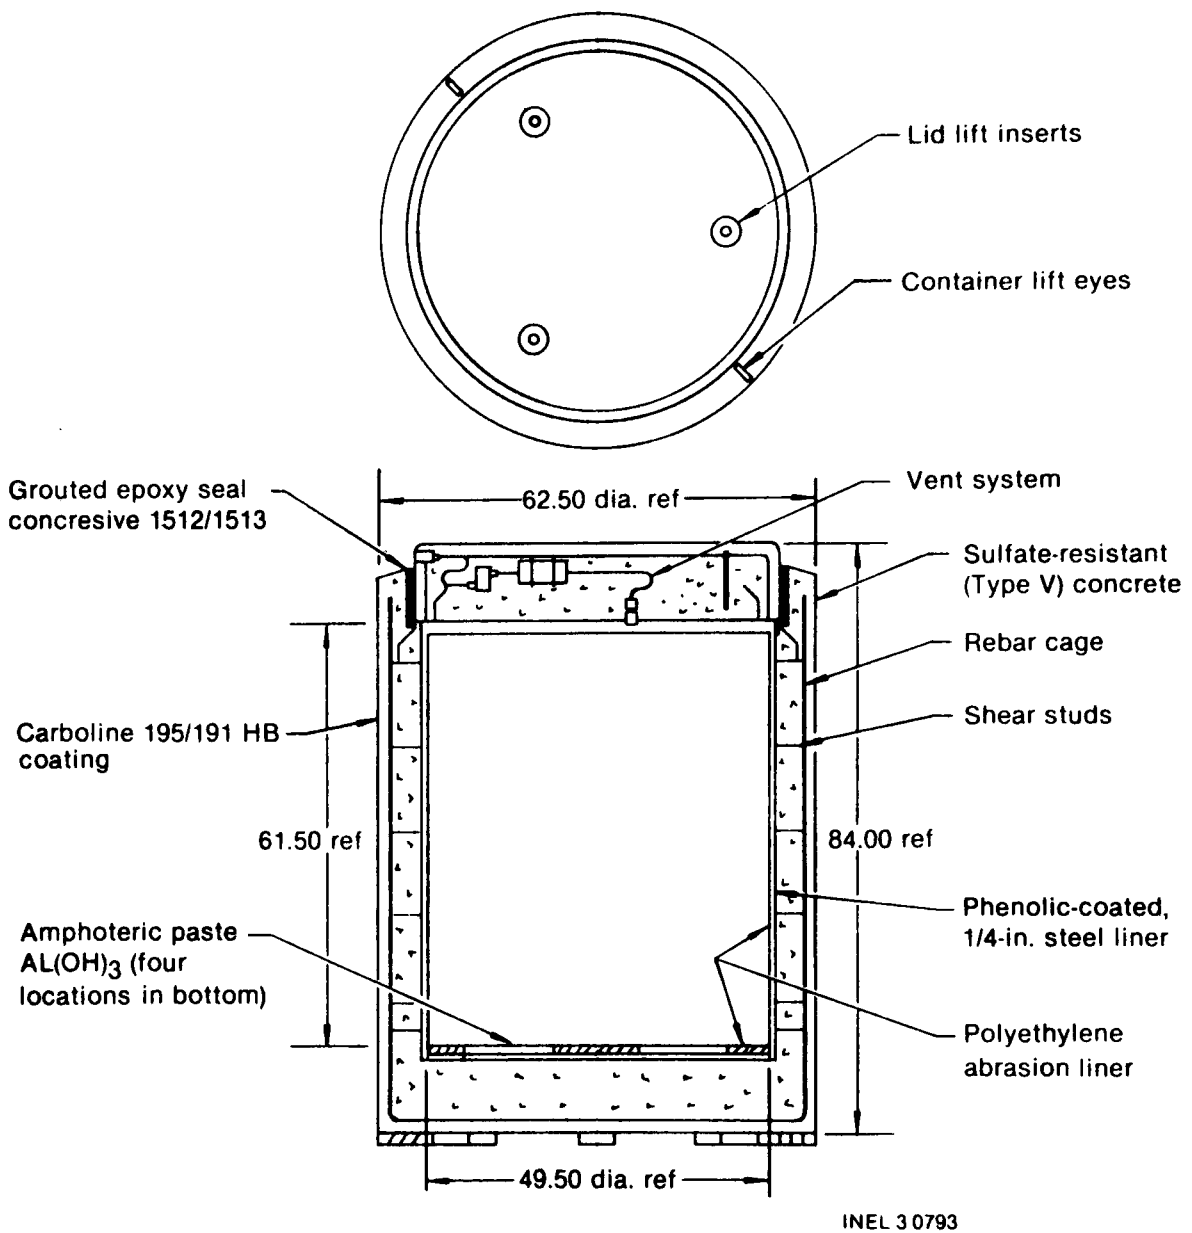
Design configuration of the high-integrity container without an enclosed EPICOR-II liner.
